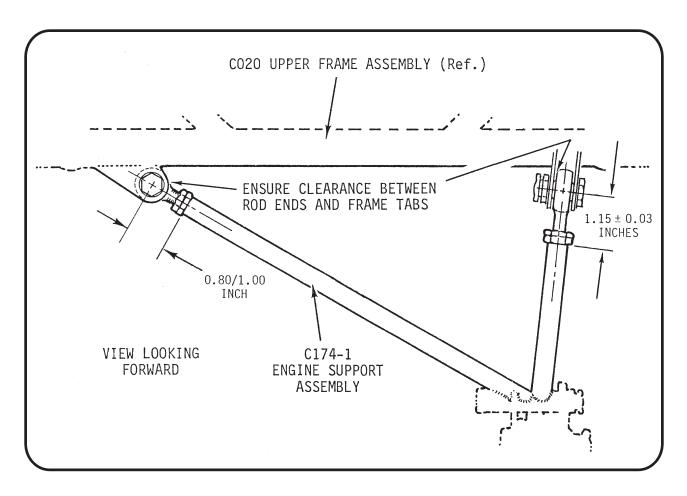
ENGINE AFT SUPPORT ASSEMBLY
